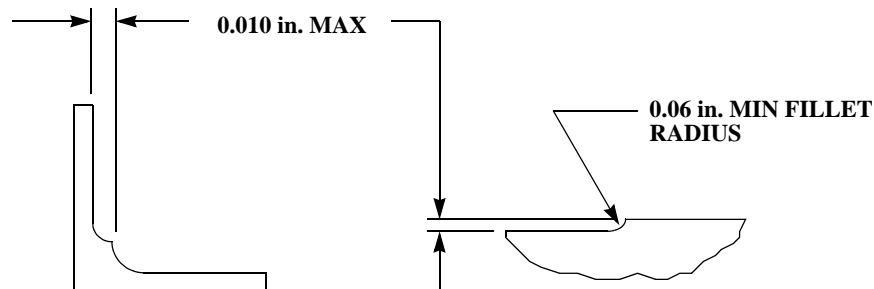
CUTTER MISMATCH TOLERANCE
